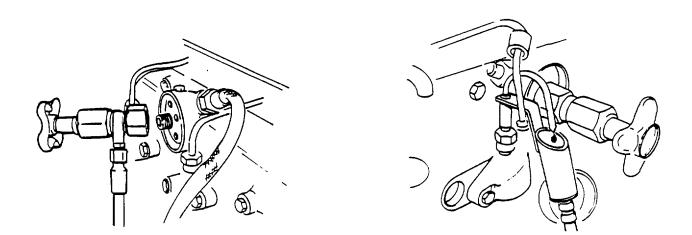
Fuel Injection Pump, Adjust (Sheet 1 of 2).
